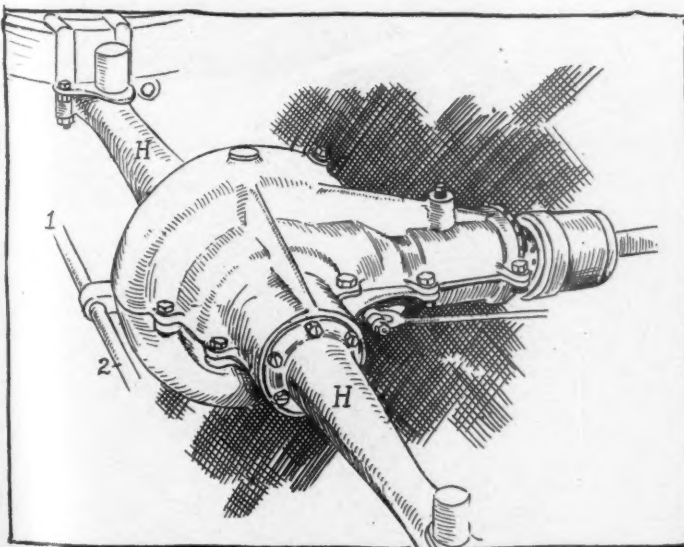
THE PRESENT WINTON REAR AXLE HOUSING
